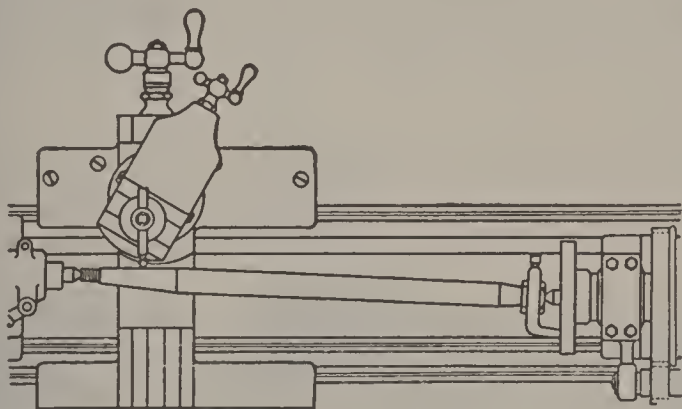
LATHE SET-UP FOR TURNING TAPER WITHOUT TAPER ATTACHMENT
